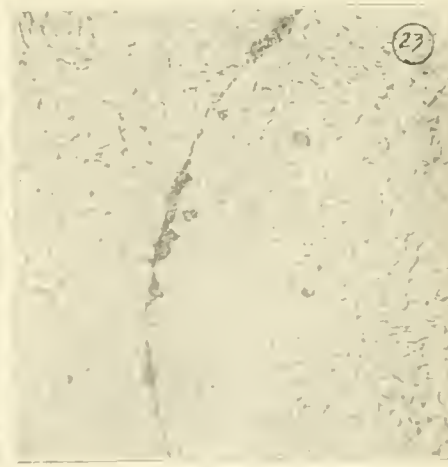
Large defect in arc weld. Dark streak is oxide of iron.
